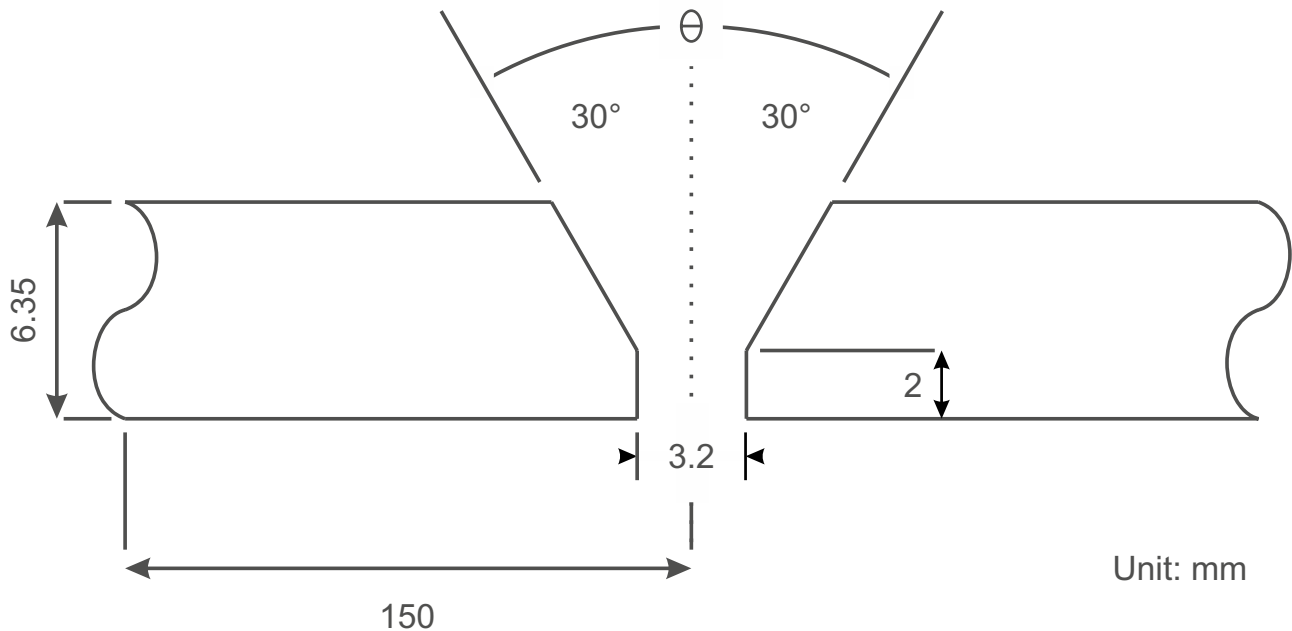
Welded joint details of single V-groove butt weld
